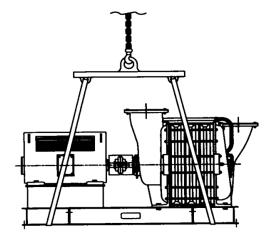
Fastening the lifting accessories to the steel base of the machine group
